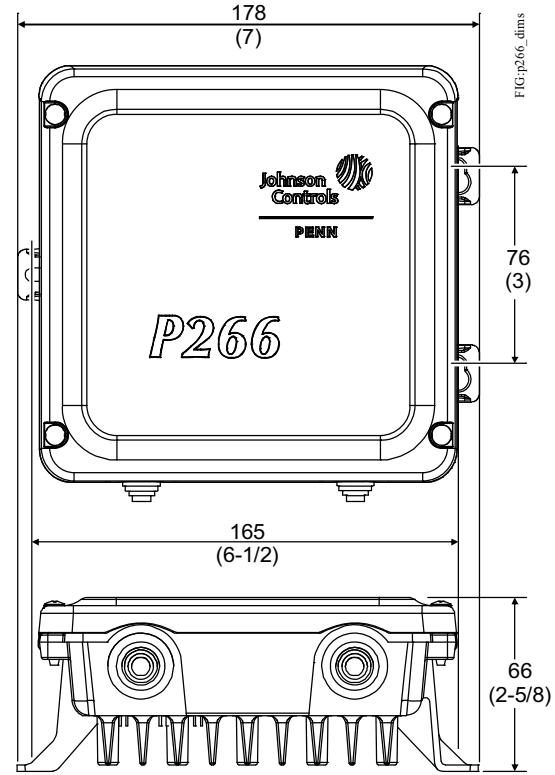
P266 Single-Phase Condenser Fan Speed Control Mounting Dimensions
